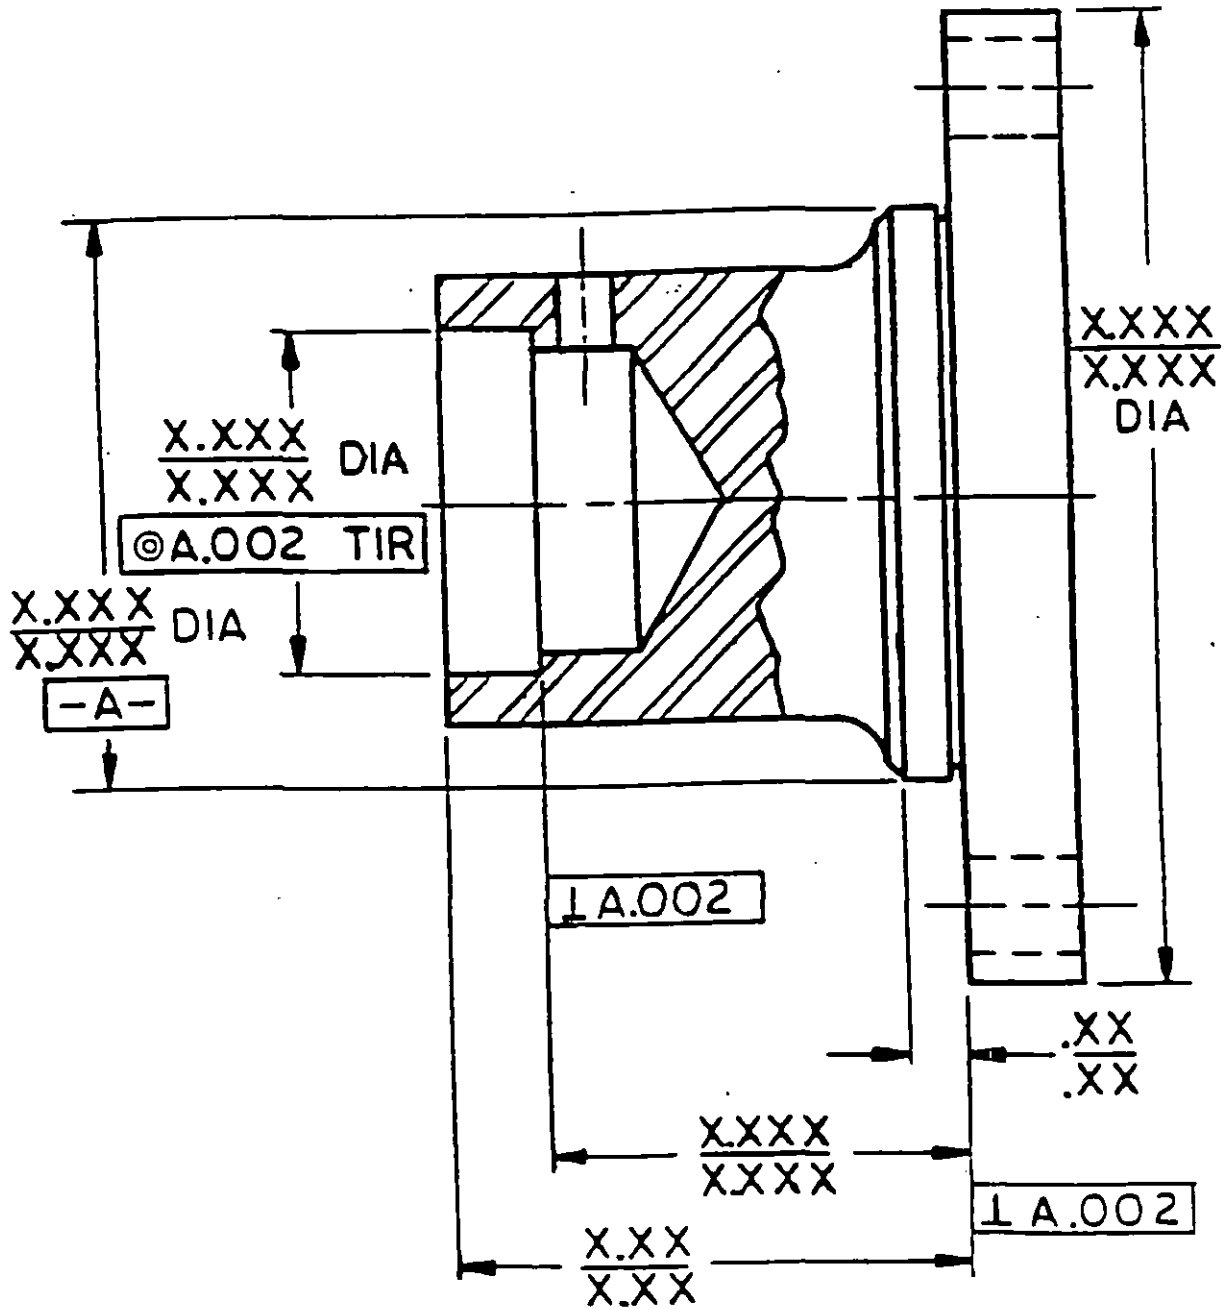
Inappropriate dimensioning of removable bearing mount.
